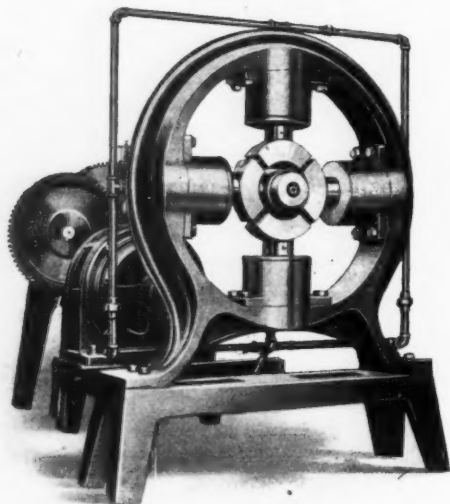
Front View of Southwark Universal Flue Welder, showing Clamping Head
